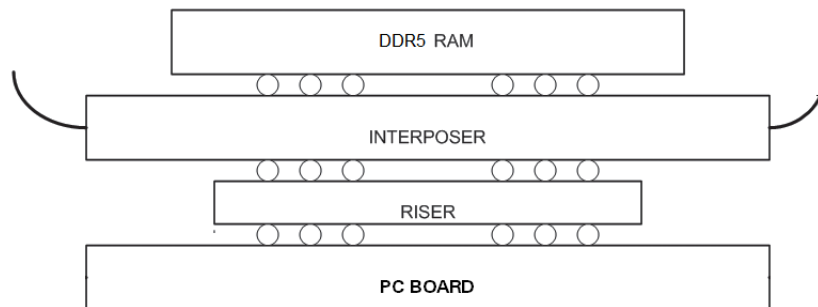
PC board, riser (or optional Grypper socket), interposer, and DRAM stack up
